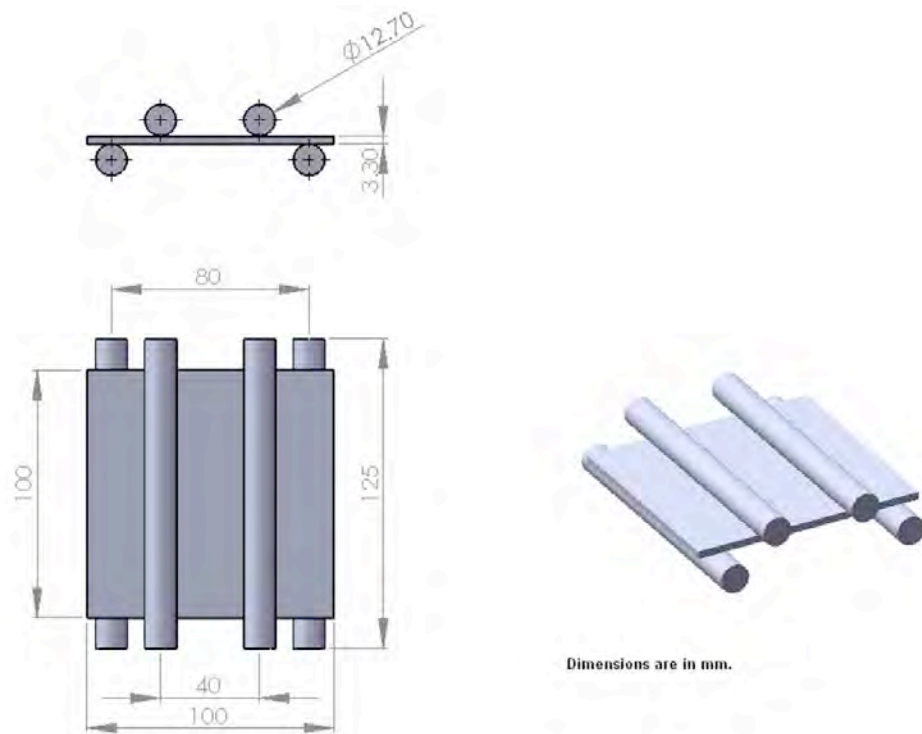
Schematic of the 4-pt bend loading configuration used in the edge-testing matrix. Dimensions in mm.
